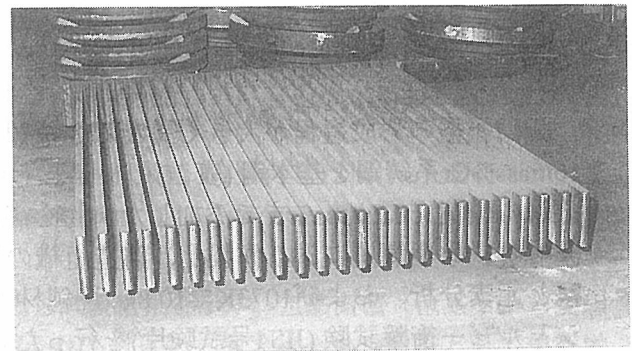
Casting tested mechanical properties; RW=6900Kg, W2280xL3330xH280mm.
